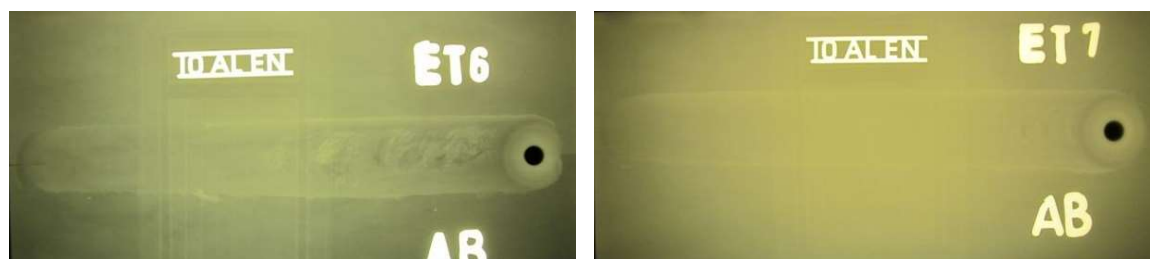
NDT inspection of weld joints by X-ray radiography
